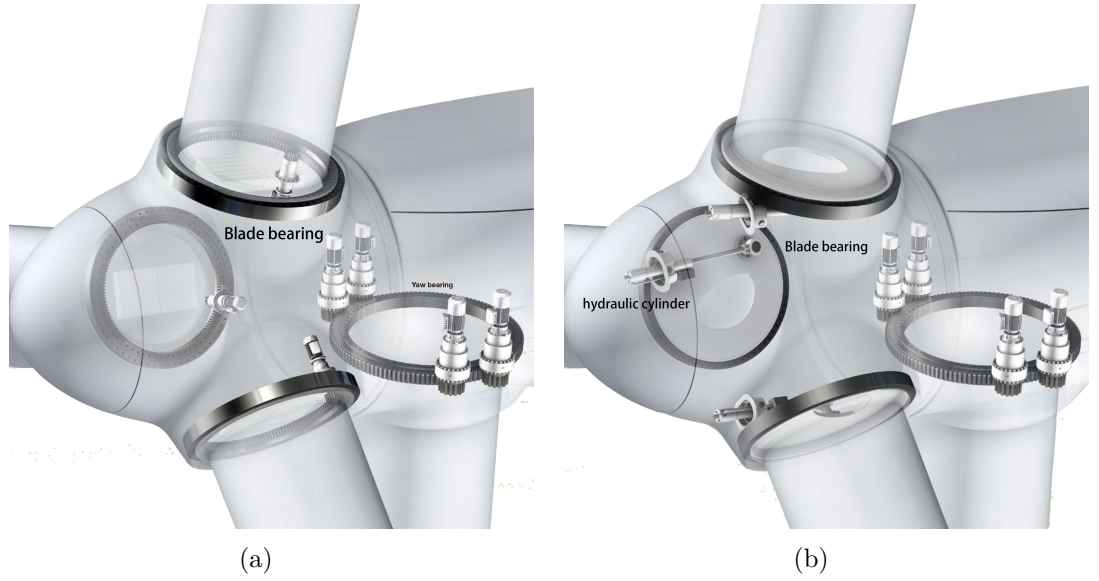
(a) Blade bearing electrical pitch systems and (b) blade bearing hydraulic pitch systems [5].
